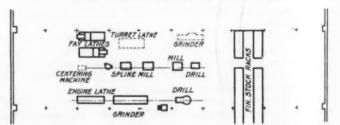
LAYOUT OF SHAFT AND SPINDLE DEPARTMENT
